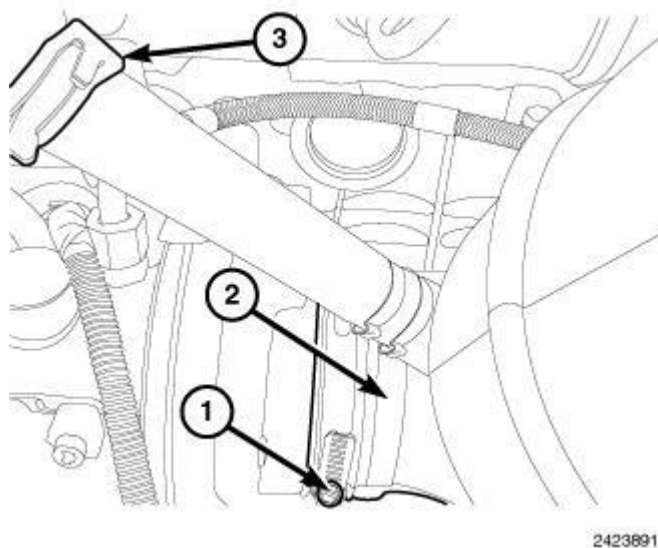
Identifying Clamp, Outlet Tube & Breather Hose
